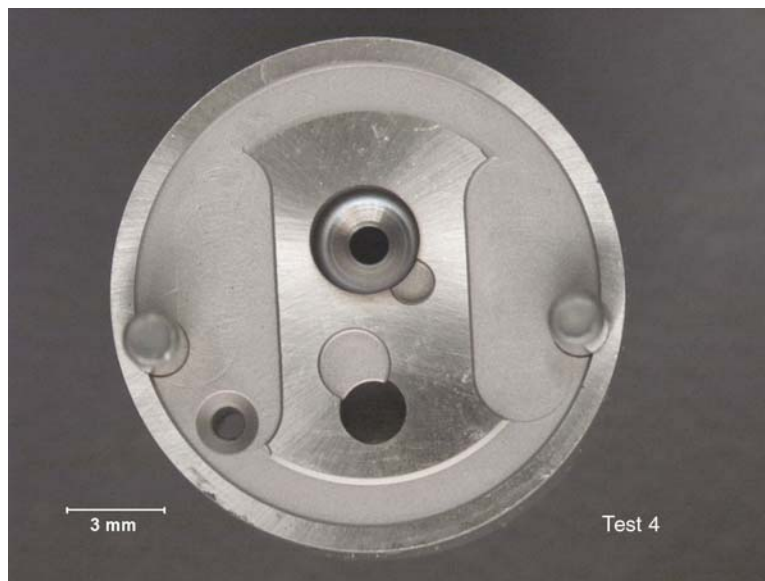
AF7868 SPK, Control Valve Plate (Bottom)
